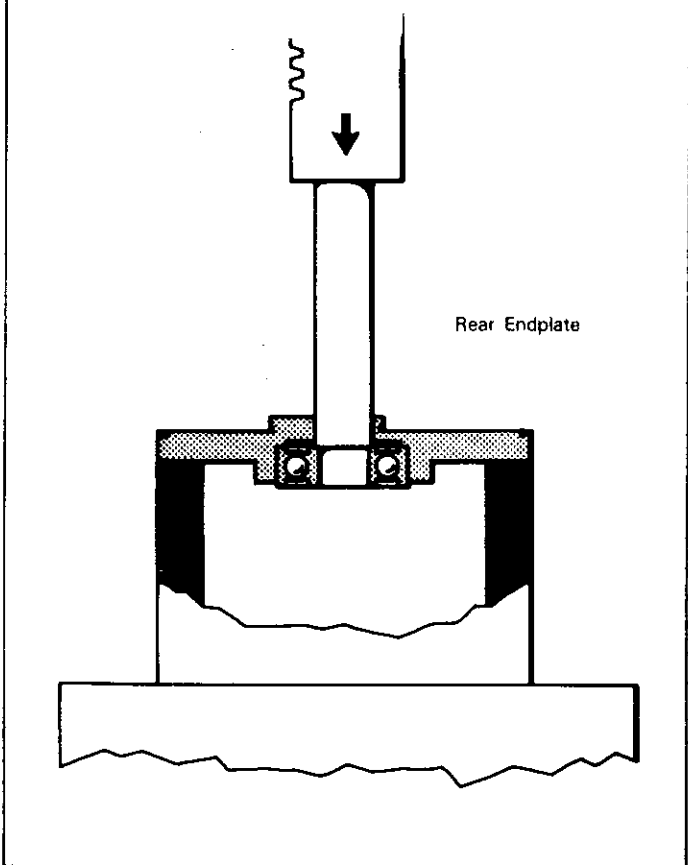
Pressing Air Motor Sleeve from Casing
